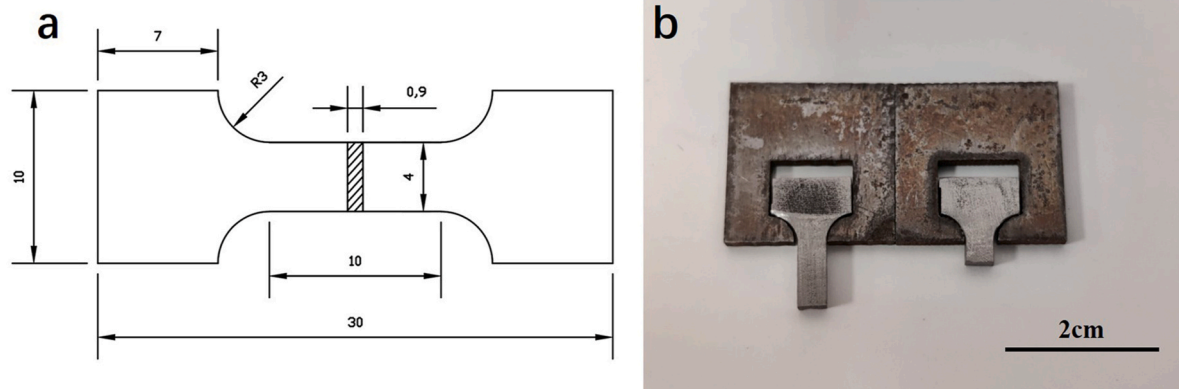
(a) Tensile test specimen (mm) and the (b) fixtures.
